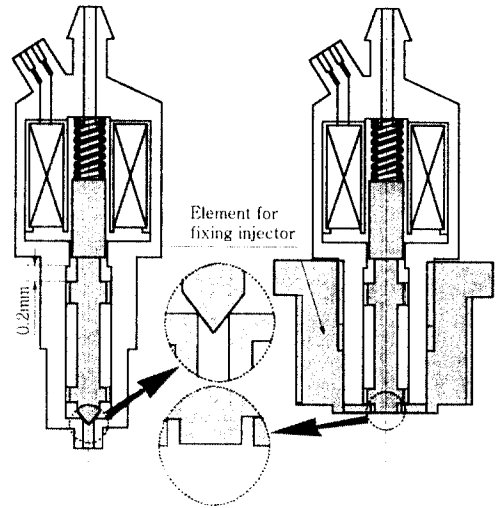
Design diagram and assembly drawing of multi-pole solenoid
